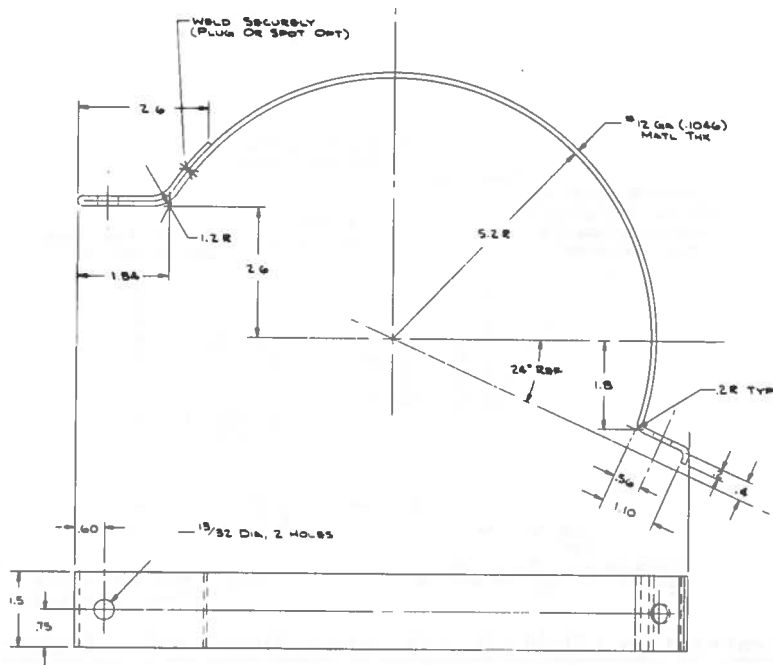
VERTICAL MUFFLER MOUNTING CLAMP
